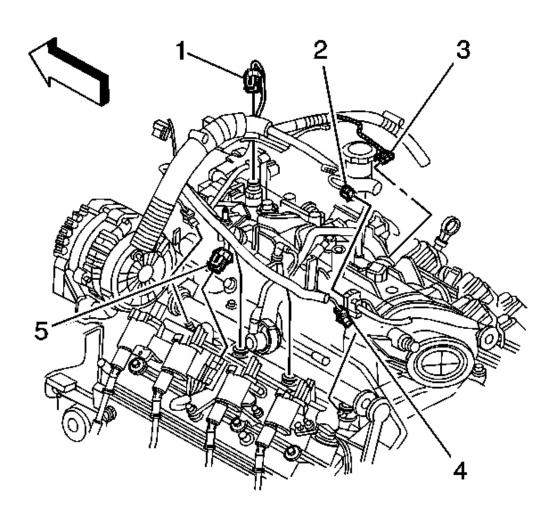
Top Of Engine Wiring Harness View Courtesy of GENERAL MOTORS CORP.
